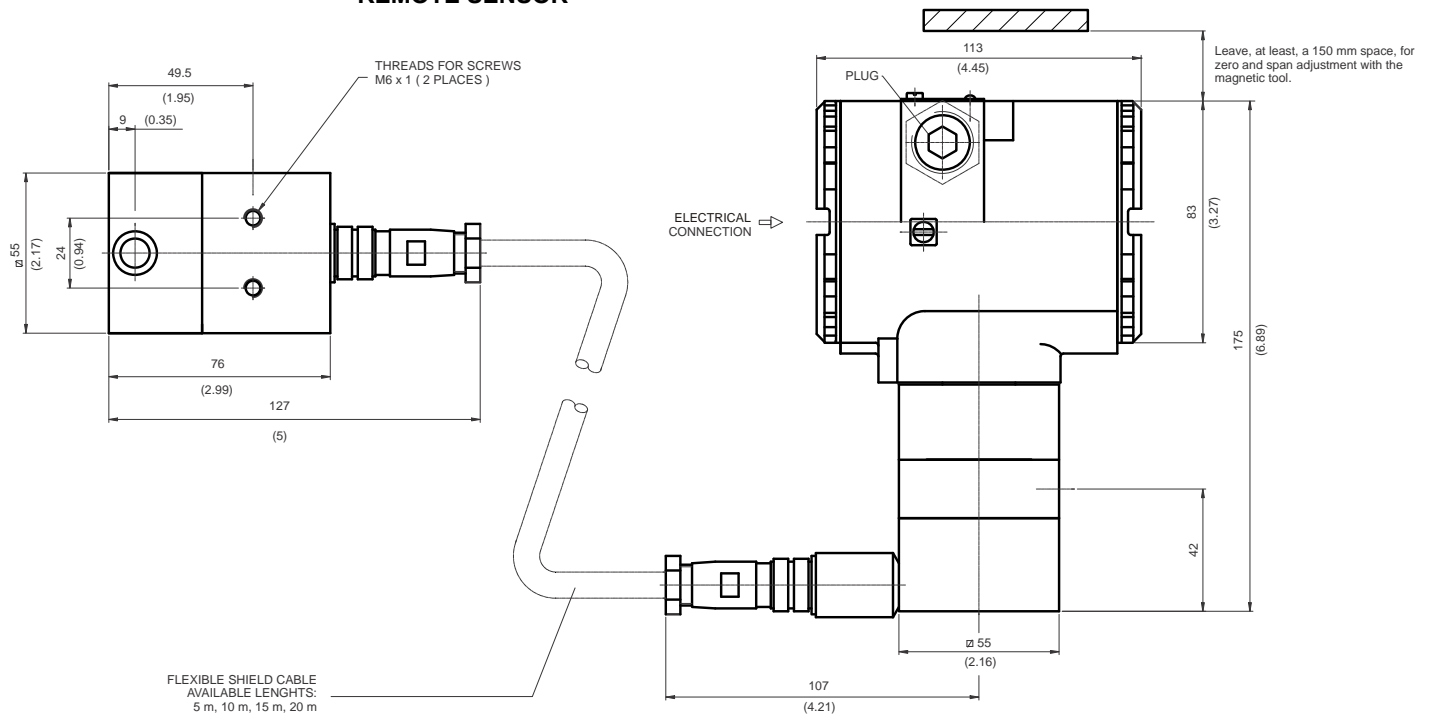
TP290 Dimensional Drawing / Magnets Dimensional Drawing
